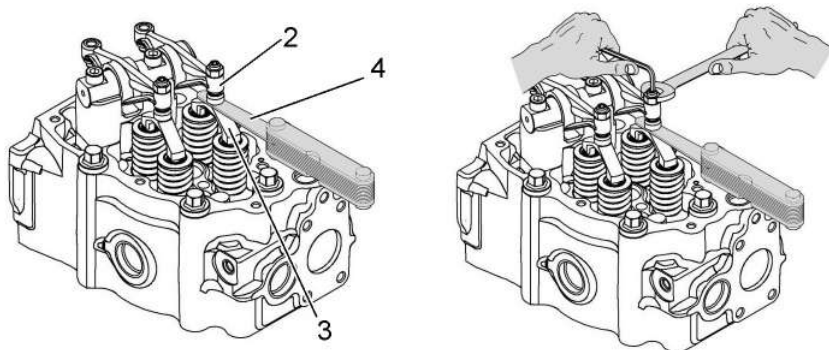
Clearance value for intake valves on the engine type identification plate.
